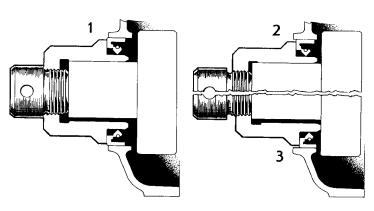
Centre spindle position on SVO 2816 (6-cyl. engine)
